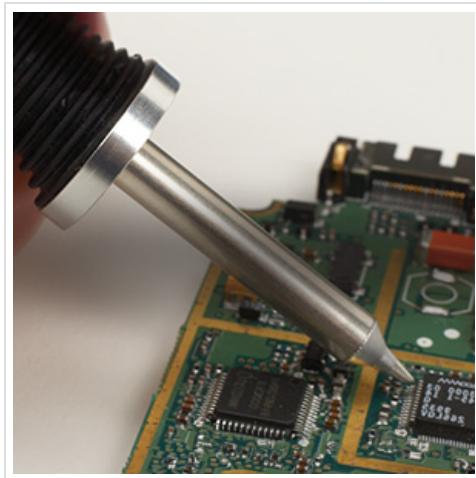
Close-up view of a desoldering tip in contact with a circuit board during operation.
